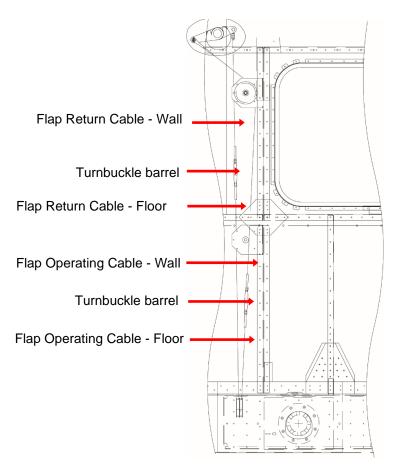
Flap Cable routing in LH Sidewall, RH similar
